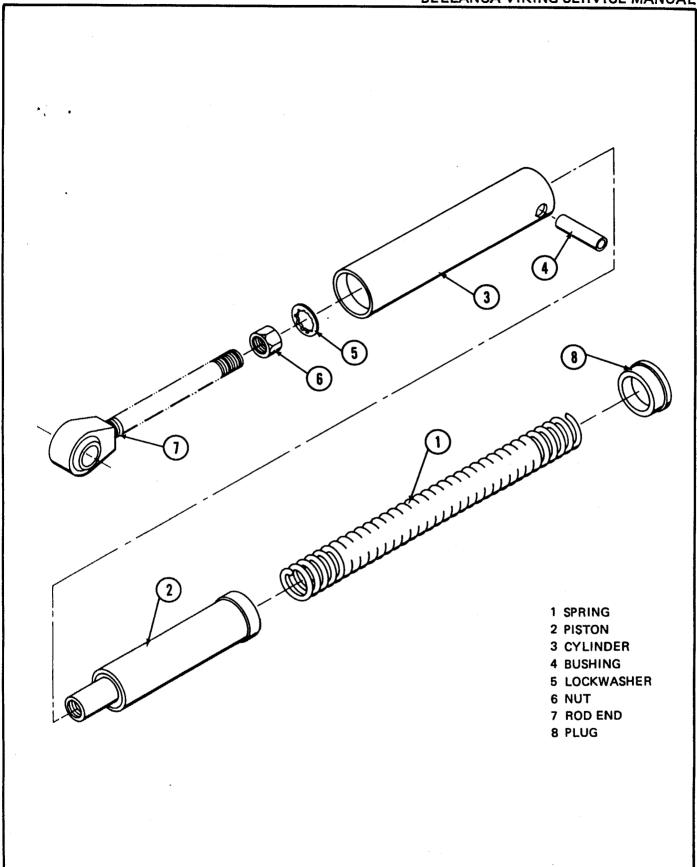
Nose Gear Extension Spring Assembly, Aircraft Serial Numbers 79-30906 and above.
